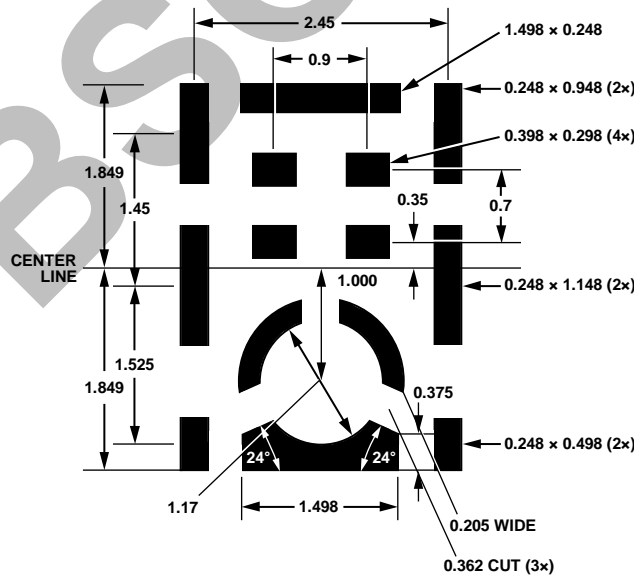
Suggested Solder Paste Stencil Pattern Layout
